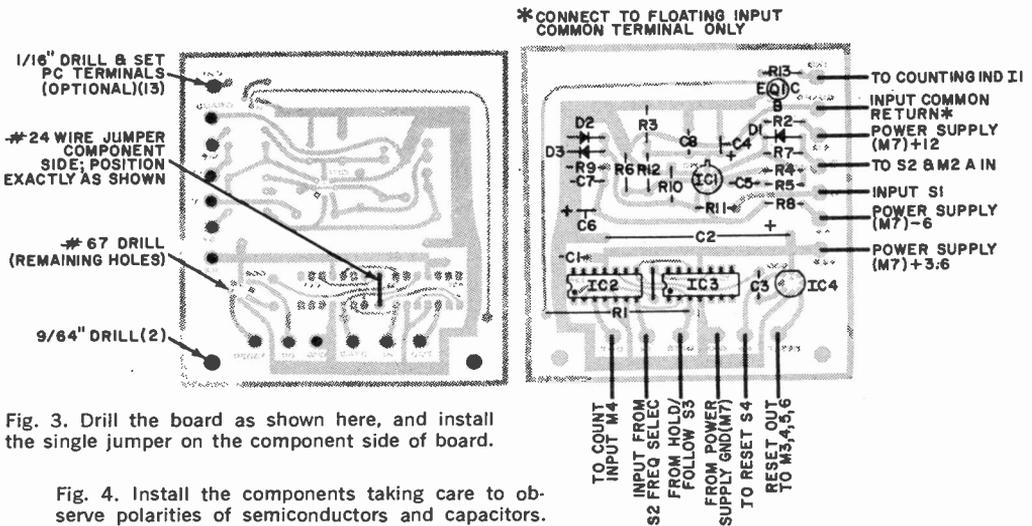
Drill the board as shown here, and install the single jumper on the component side of board.
